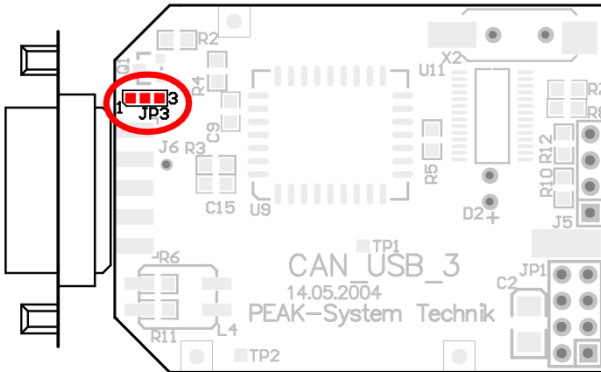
PCAN-USB board (IPEH-002021), solder field JP3
